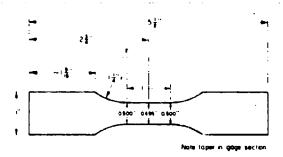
UNNOTCHED SHEET FATIGUE SPECIMEN
